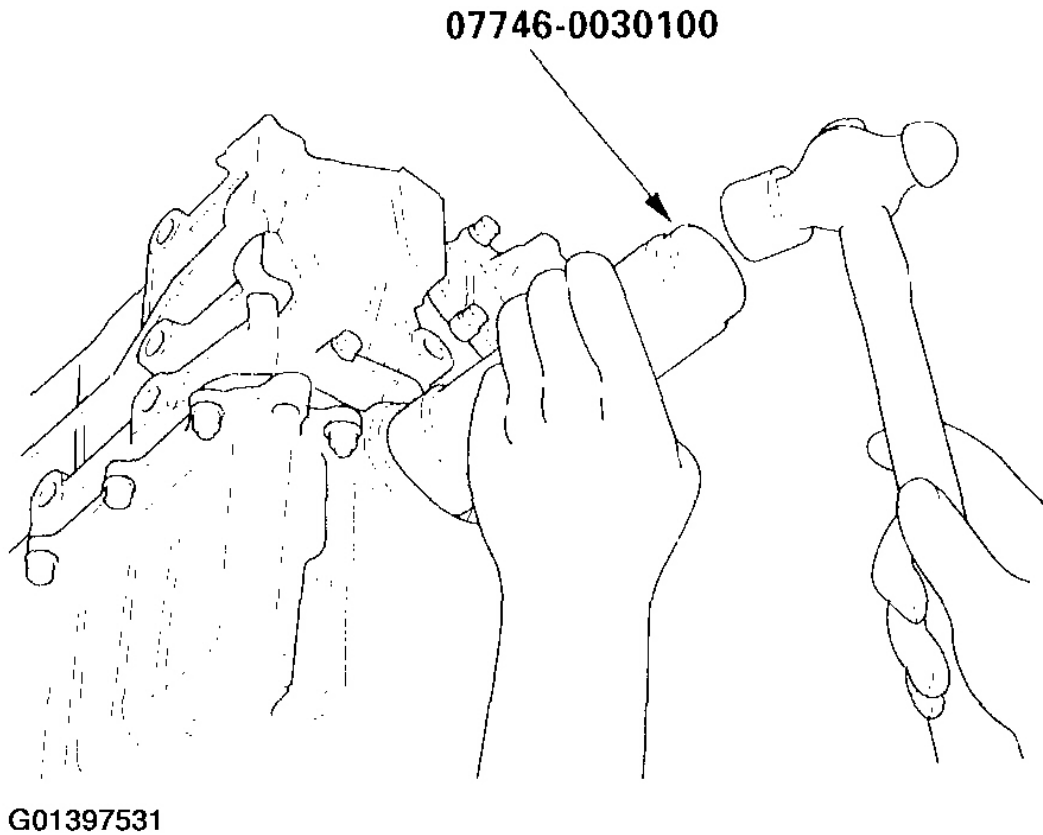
Driving In Crankshaft Oil Seal With Special Tool
